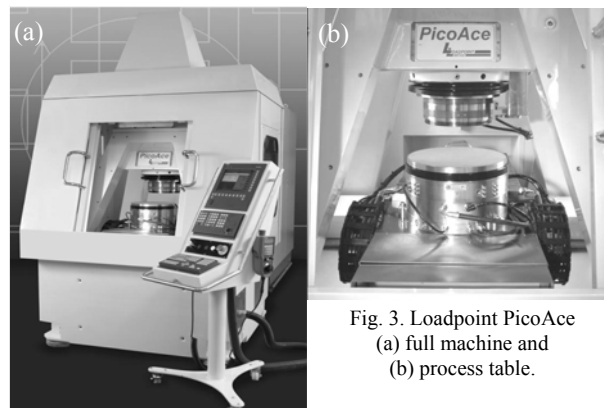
Loadpoint PicoAce (a) full machine and (b) process table.
